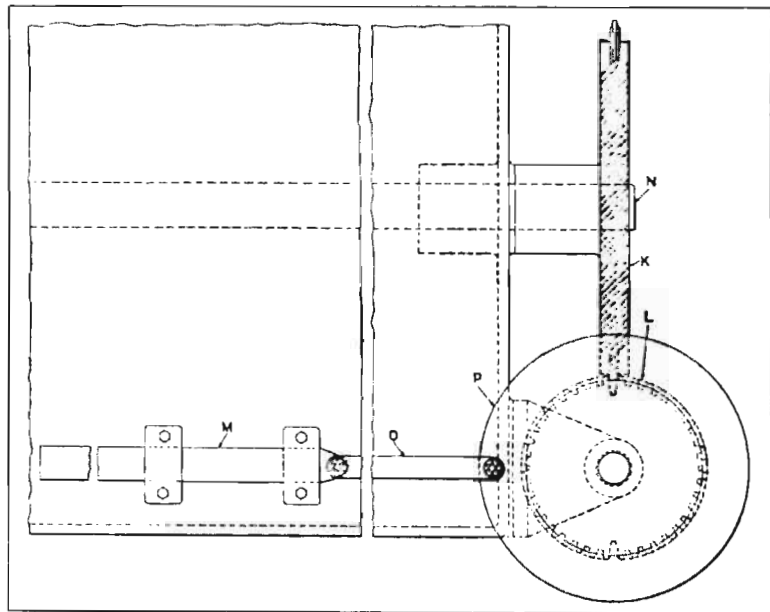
Modified Helical Driving Gears N and L Arranged to Produce a Reciprocating Movement of Slide M with a Dwell at Each End of Its Travel.
